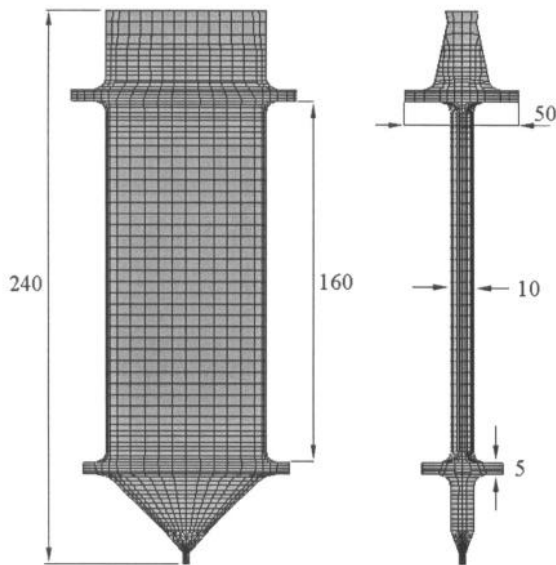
Solid shrouded blade used for the initial casting experiments.
